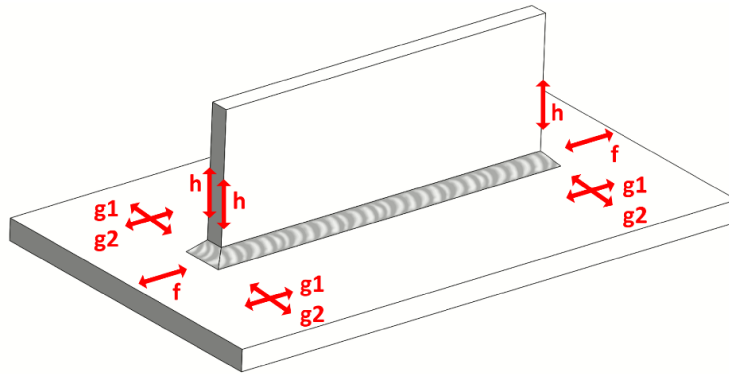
Toe checks to be performed at the start and finish of the weld
